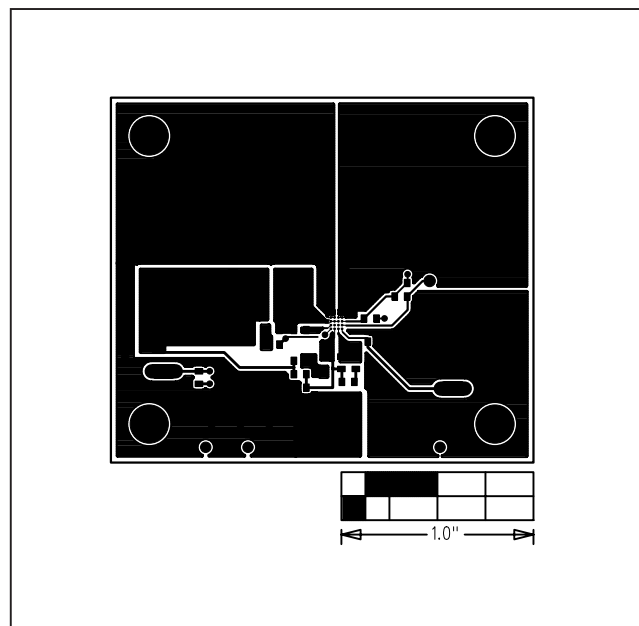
MAX15040 EV Kit Component PCB Layout—Component Side
